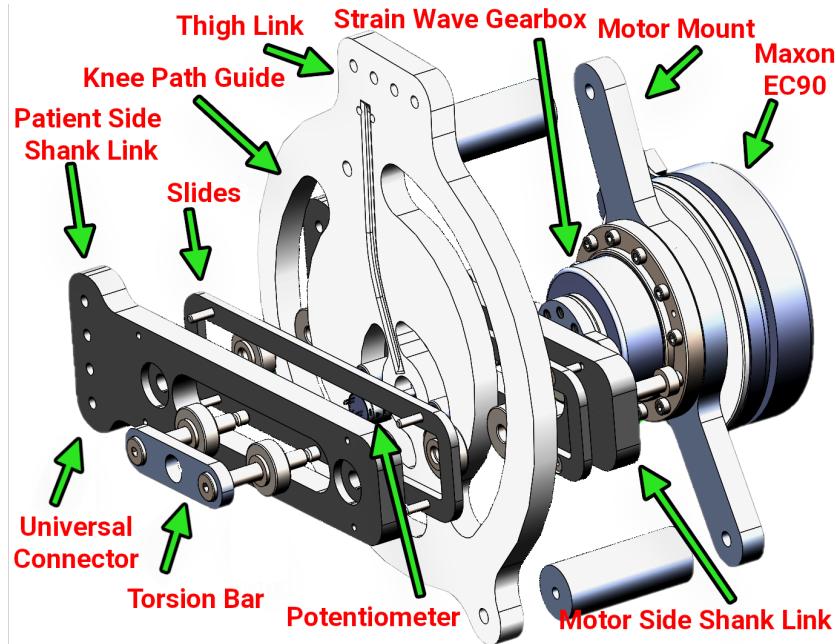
Exploded view of the knee joint, with all relevant components labeled
